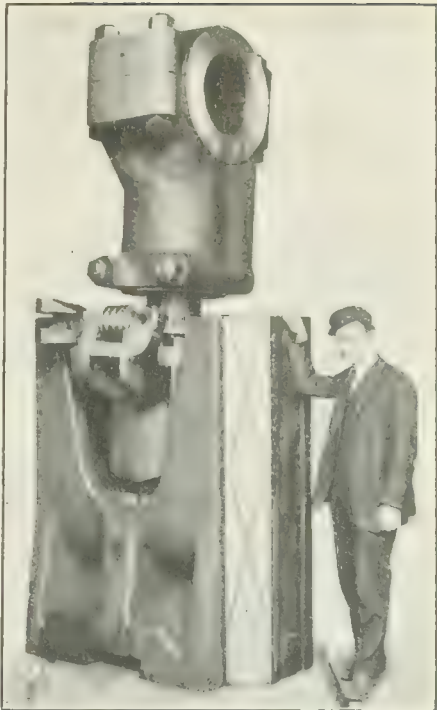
The Slide, the Pitman and the Pitman Screw Assembled. The Weight of These Three Parts Is About 39,000 Lb.
